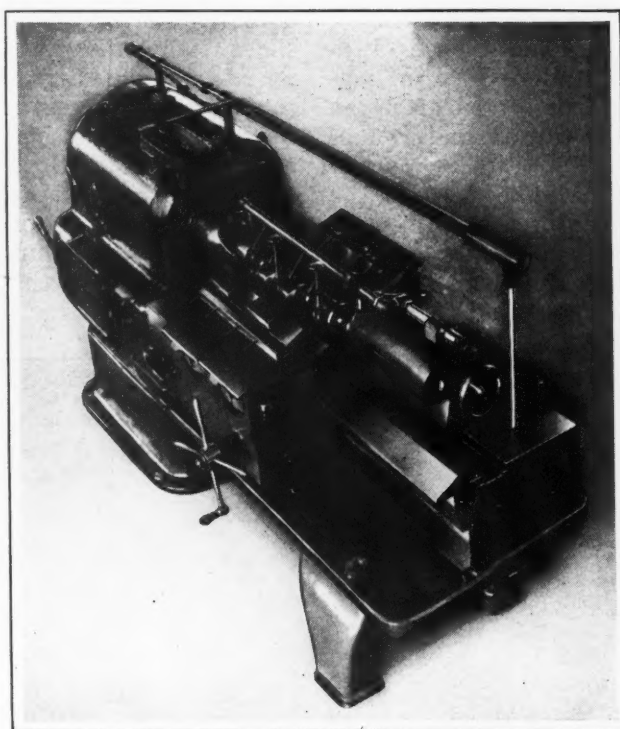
Plan View of the Crankshaft-cheek Beveling Machine
